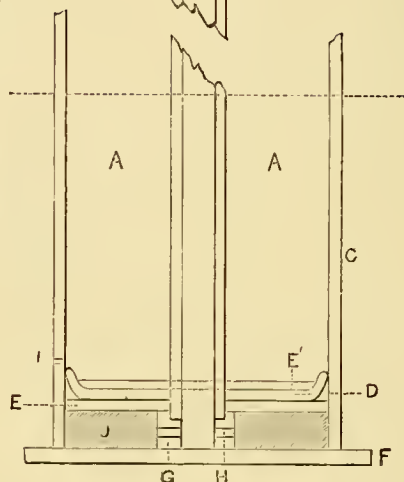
MECHANICAL VALVE IN PISTON ROD. A, Outer Tube. B, Rod in Tube. C, Barrel. D, Indiarubber Washer, $\frac{1}{8}$ in. larger than Barrel. E, E', Brass Discs holding Washer in place. F, Bottom of Barrel. G, Brass Disc at end of Piston Rod. H, Indiarubber Washer cemented to Disc. I, Pin-hole in Barrel. J, Cork Washer cemented to Disc E.
